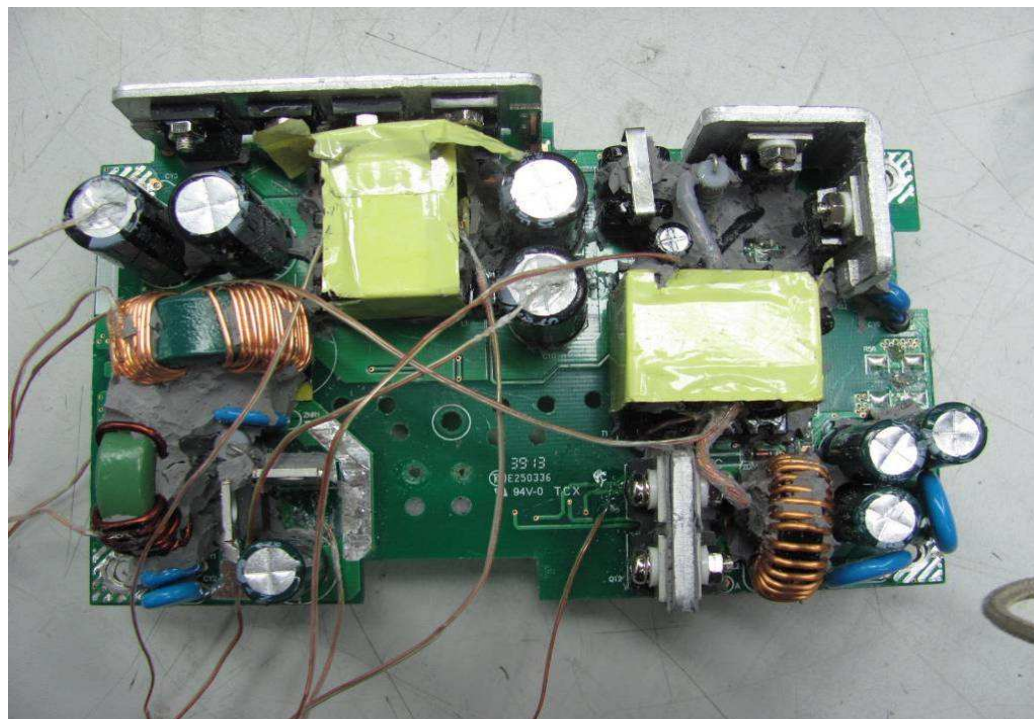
Internal view – Component side view of PCB for model GTD93035L6013.2-F
